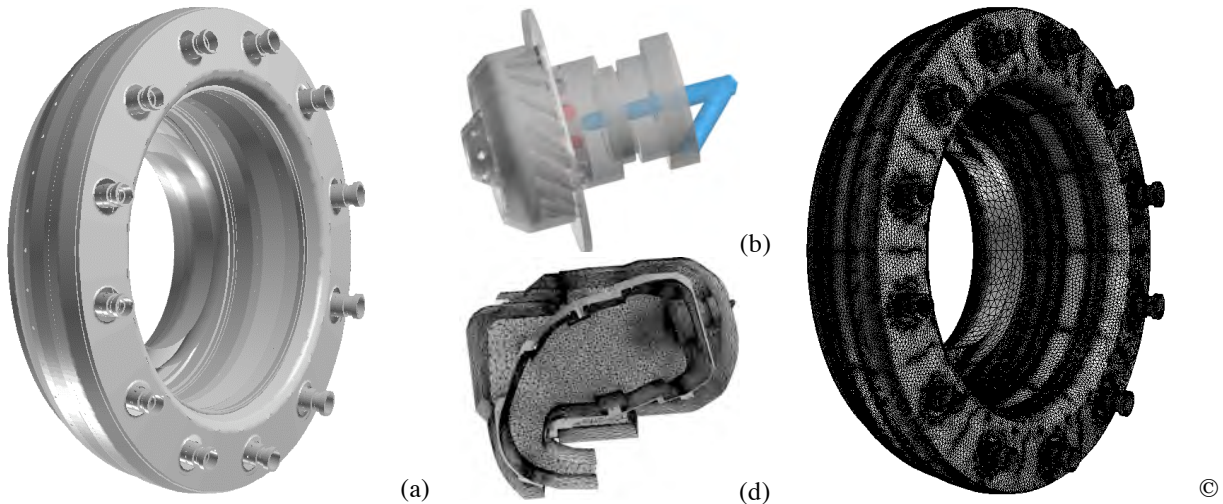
(a) Perspective view of the aeropropulsion gas turbine combustor with the twelve fuel-air spray nozzles, (b) detailed view of a fuel-air spray nozzle, (c) annular combustor grid and (d) detailed view of the combustor cross-sectional profile with the unstructured grid following the geometry.
